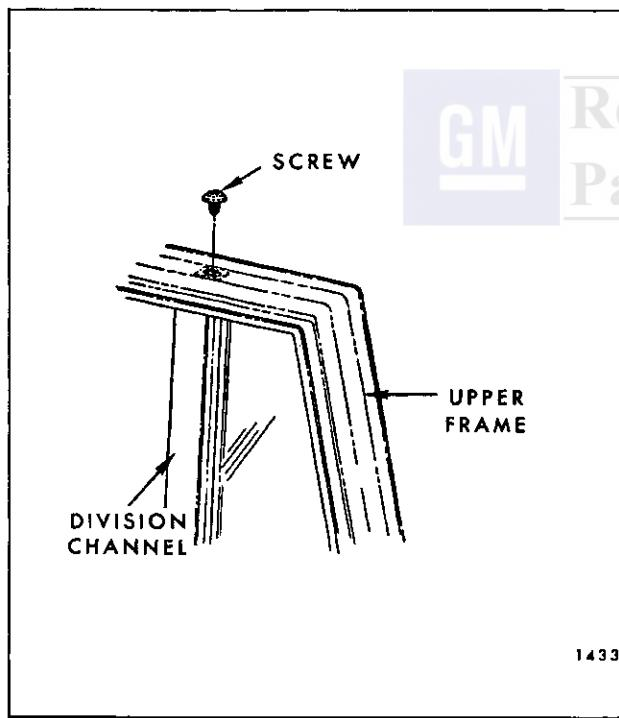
Rear Door Ventilator Attachment — "X" Styles
